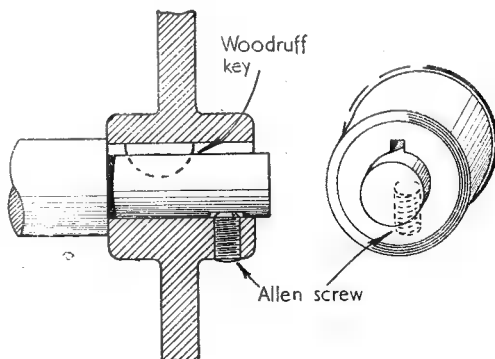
Wheel mounting with Woodruff key and Allen screw
